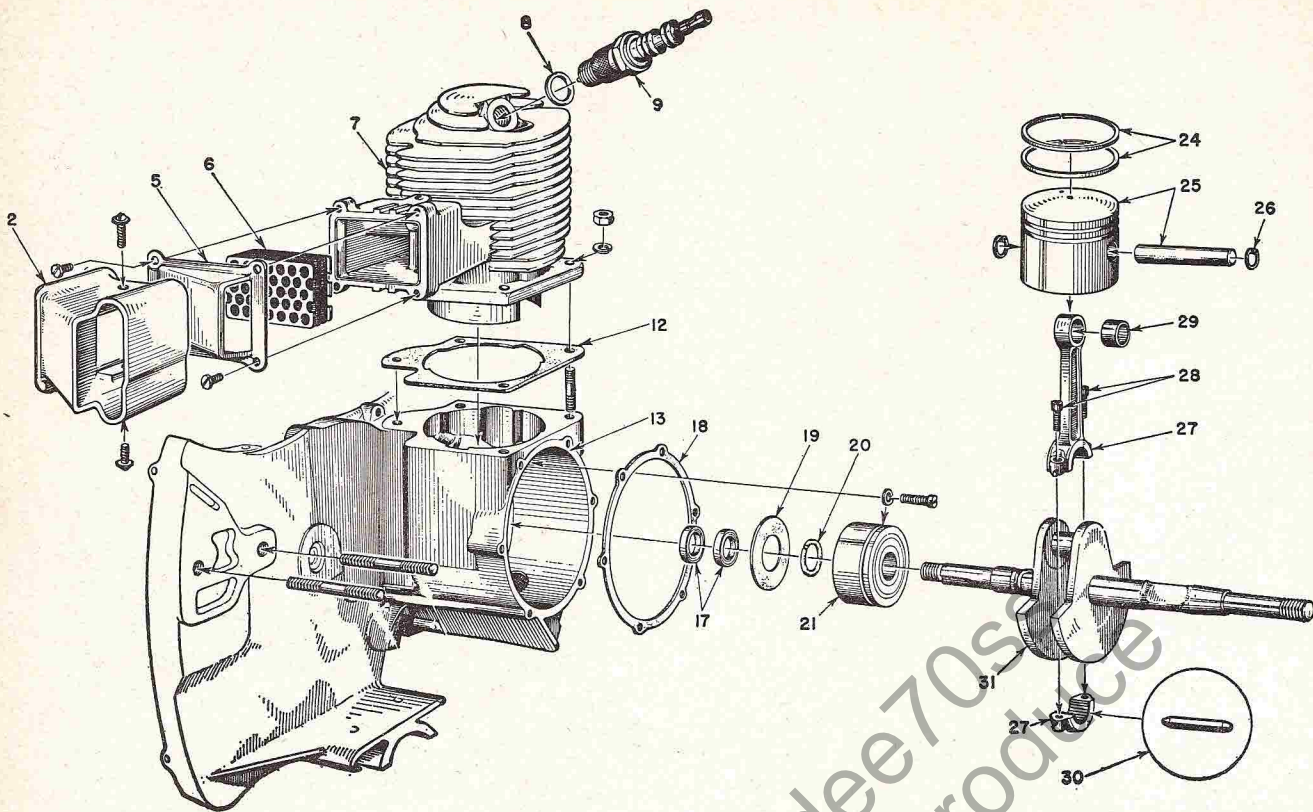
Exploded view of model 6-22 engine, typical of models using one piece crankcase with integral mounting plate.
